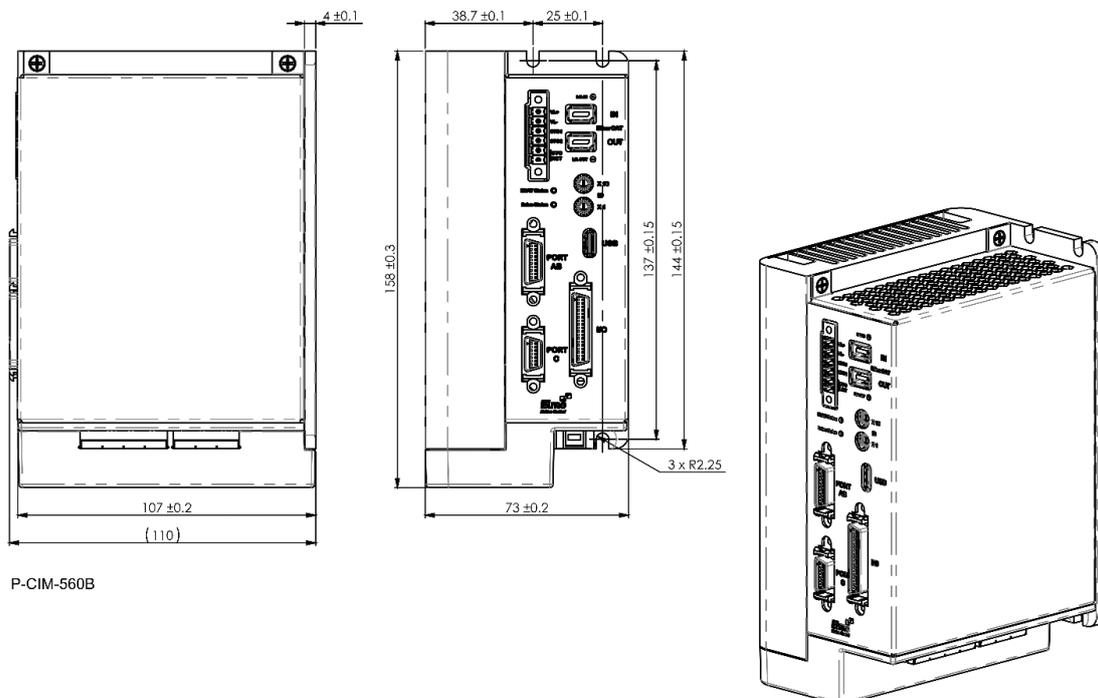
Platinum Cimbasso Fin+Fans Dimensions
